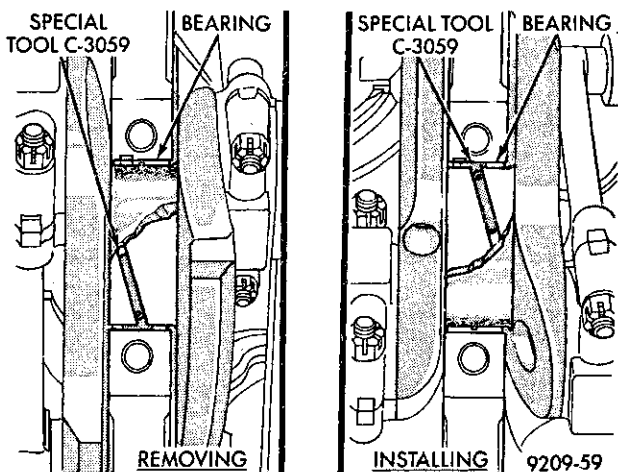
Upper Main Bearing Removal and Installation with Tool C-3059
